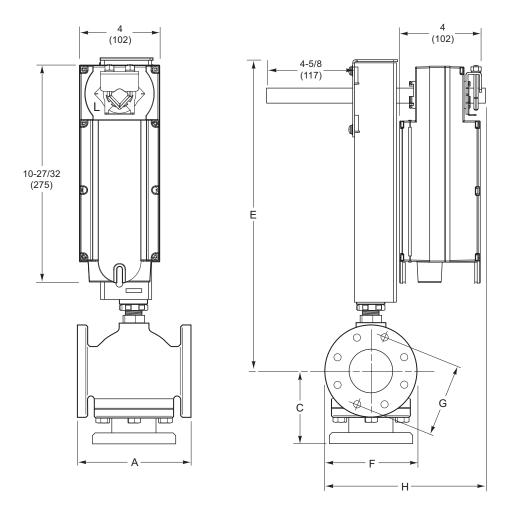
Mx40-717x with 2-1/2" to 4" 3-Way Flanged Globe Valve With AV-607-1
